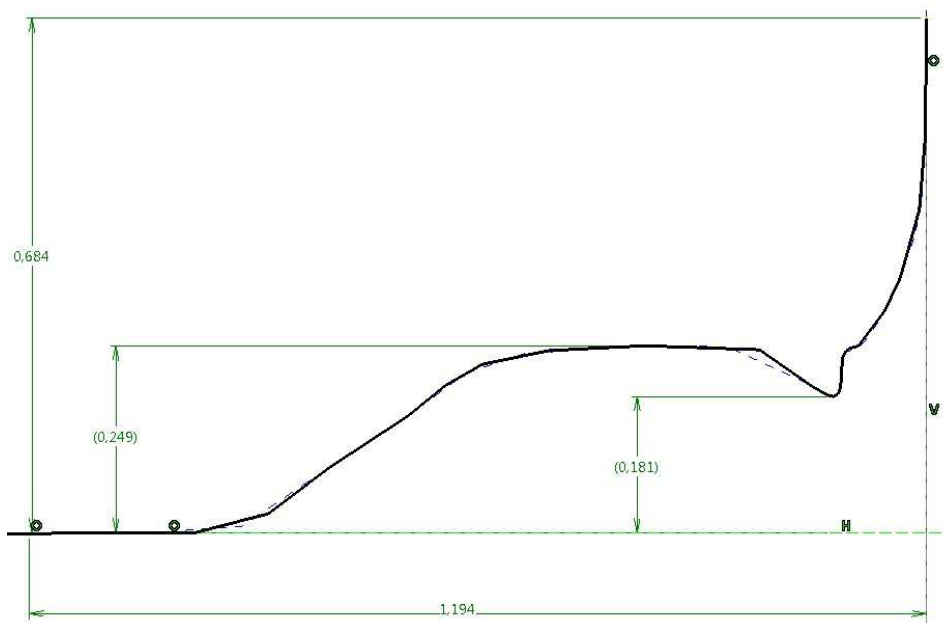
Distortion profile of under-rolling internal hole (from the back side toothed wheel rim)
